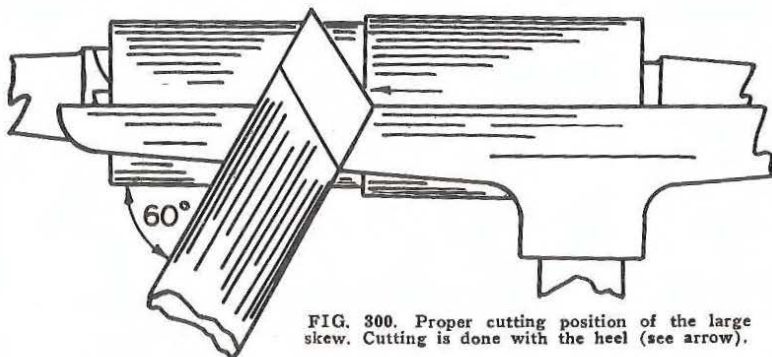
Proper cutting position of the large skew. Cutting is done with the heel (see arrow).
